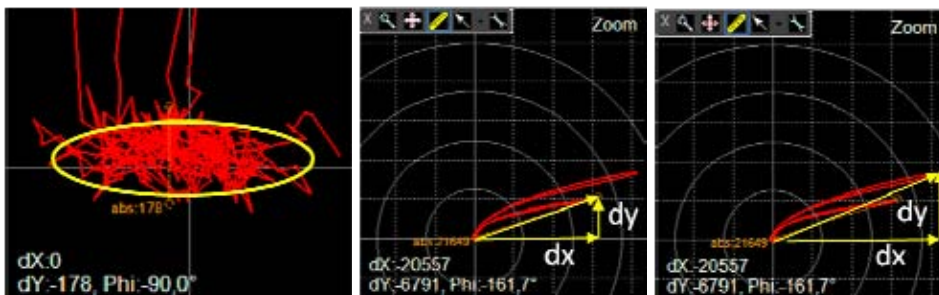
Eddy current noise level and indication from reference defects in copper weld inspection.
